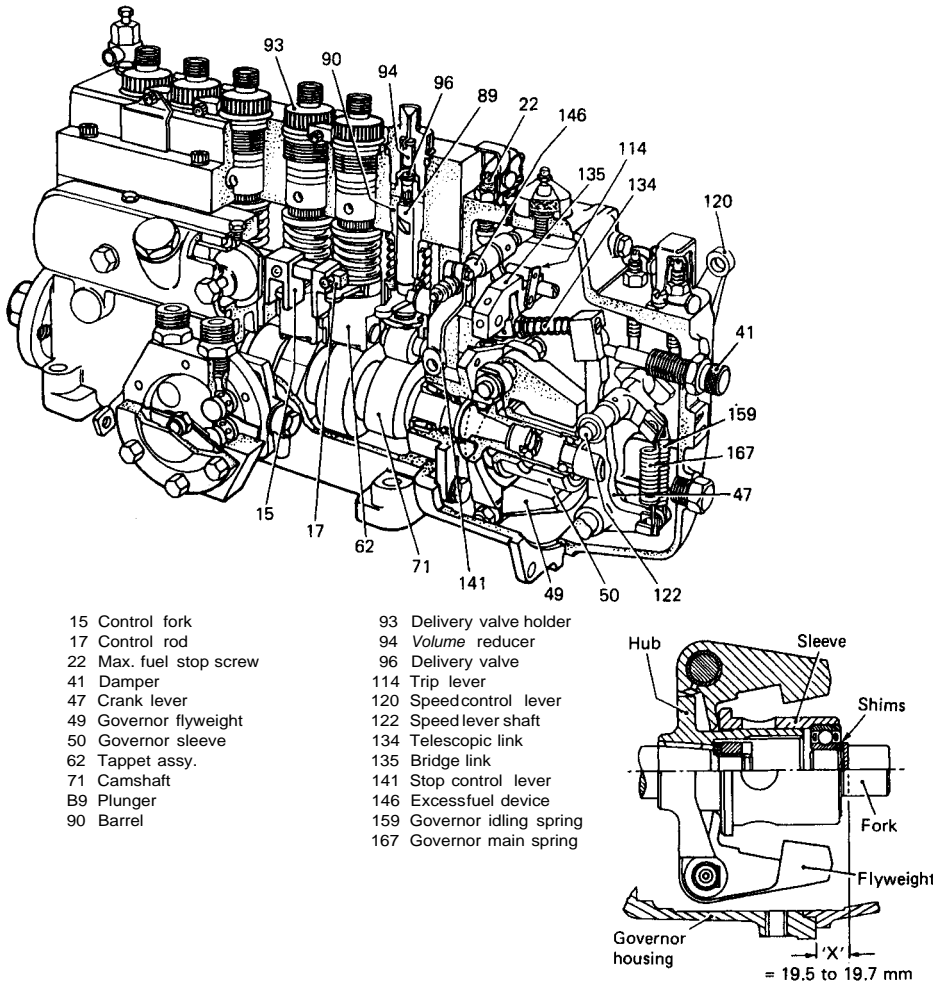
Cutaway section of typical 6-cylinder MAJORMEC pump (Courtesy: Lucas Automotive Ltd)
